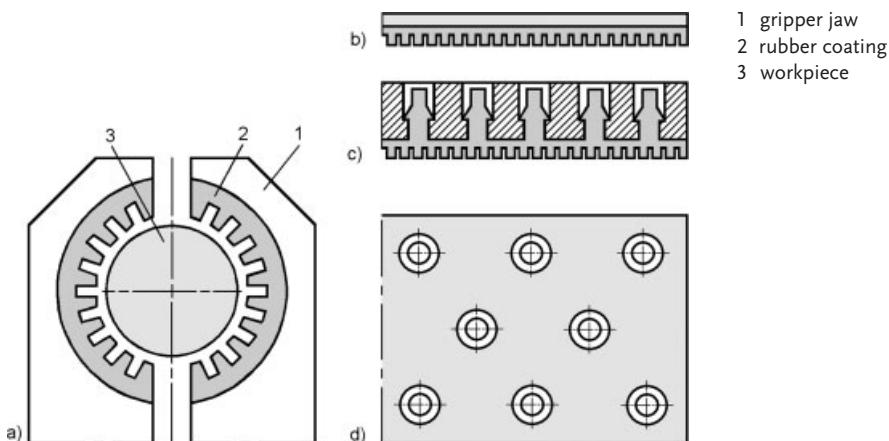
Rubber knob bar as a gripper jaw coating
